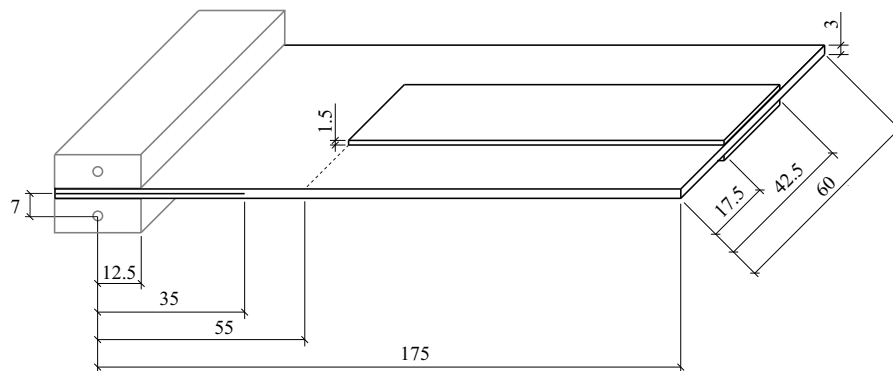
Dimensions of the partially reinforced DCB specimen (units in mm).
